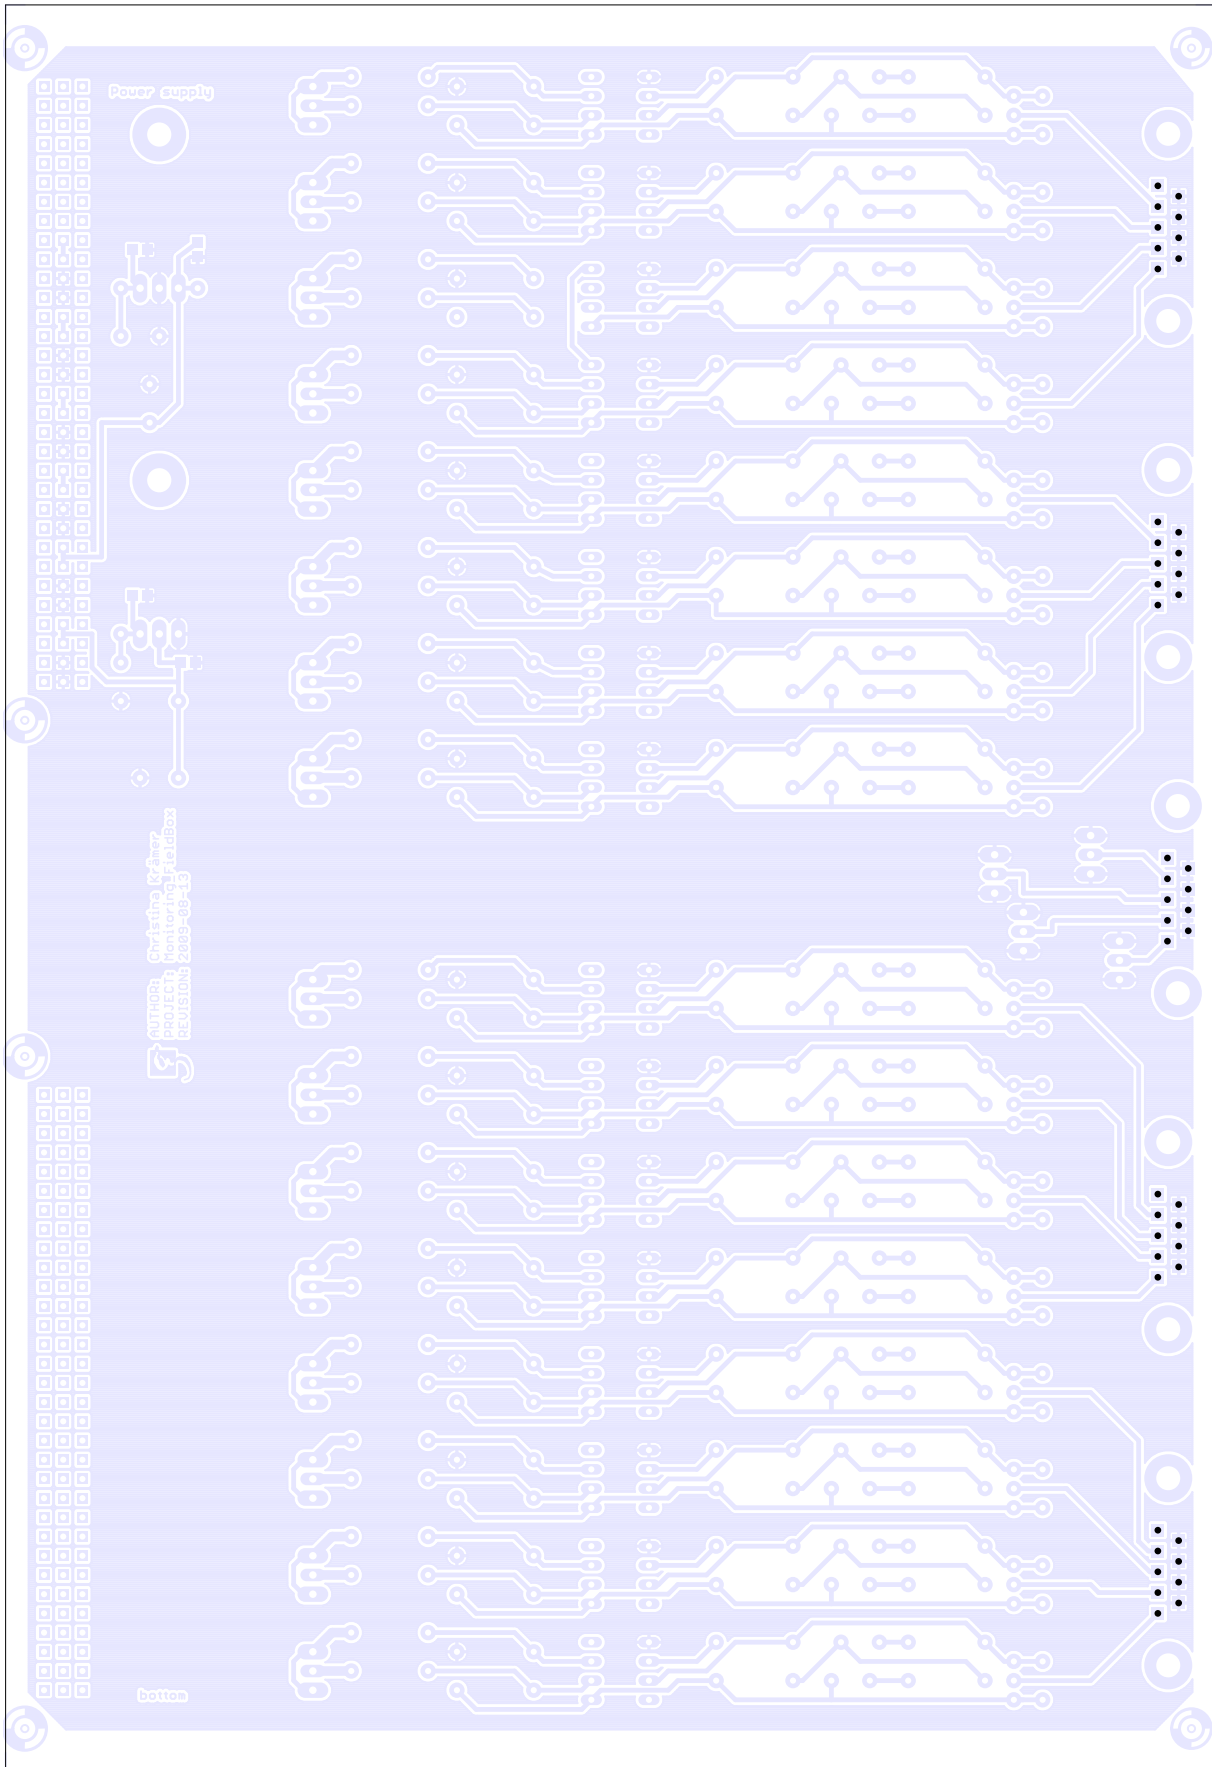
Board bottom view showing drills with 0.9 mm (0.035 in) diameter
